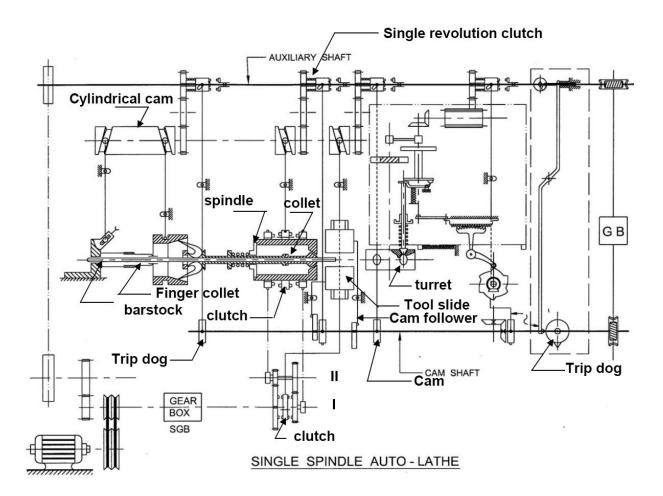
Typical kinematic system of single spindle automatic lathe.
